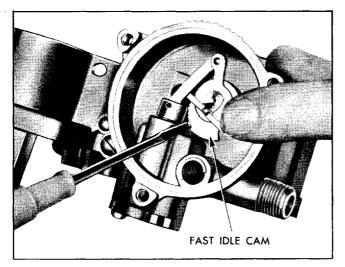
B-18 Removing Choke Piston and Shaft Assembly—Carter
